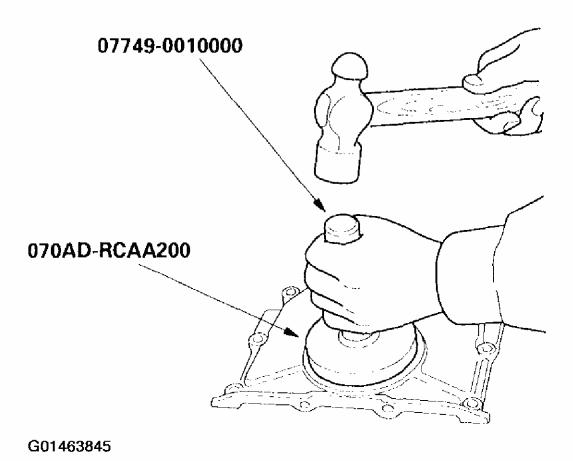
Driving The Crankshaft Oil Seal Courtesy of AMERICAN HONDA MOTOR CO., INC.
